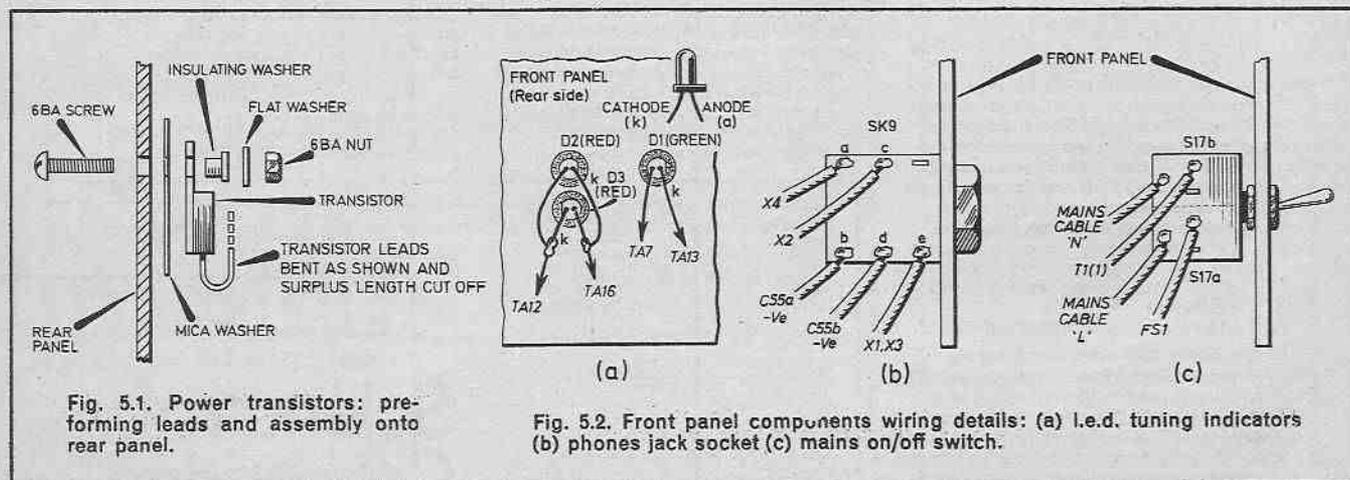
Power transistors: performing leads and assembly onto rear panel.
